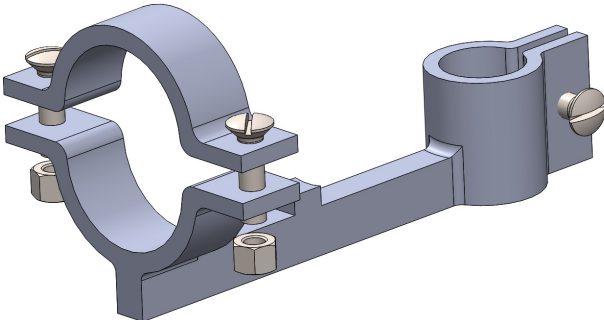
CAD of the support for microscopic cameras, designed in *Solidworks
